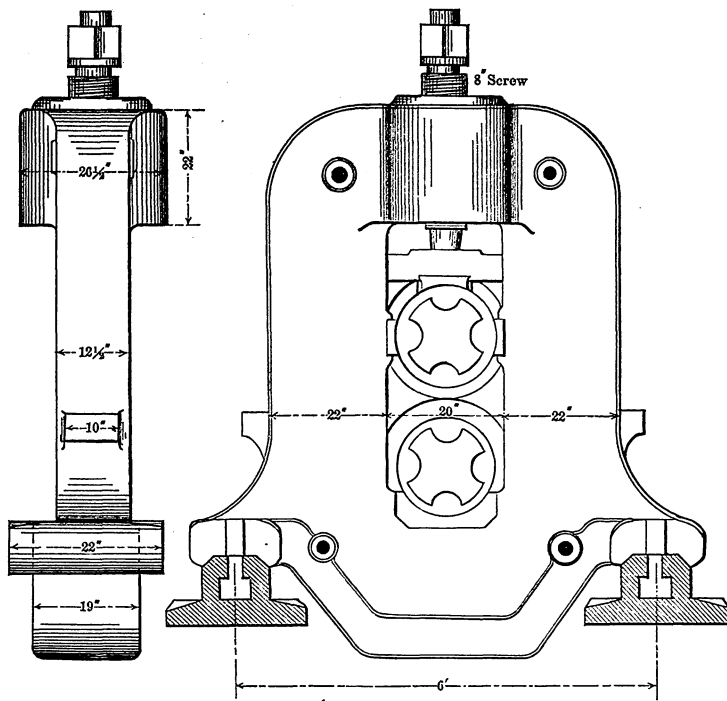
Sheet Mill Housing, Leechburg Design.—24-Inch Rolls.—Weight, 21,000 Pounds.
